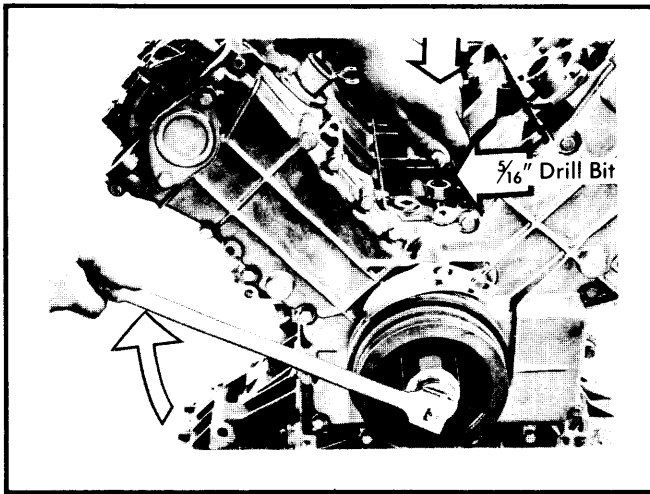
Locating Top Dead Center for No. 1 Cylinder
